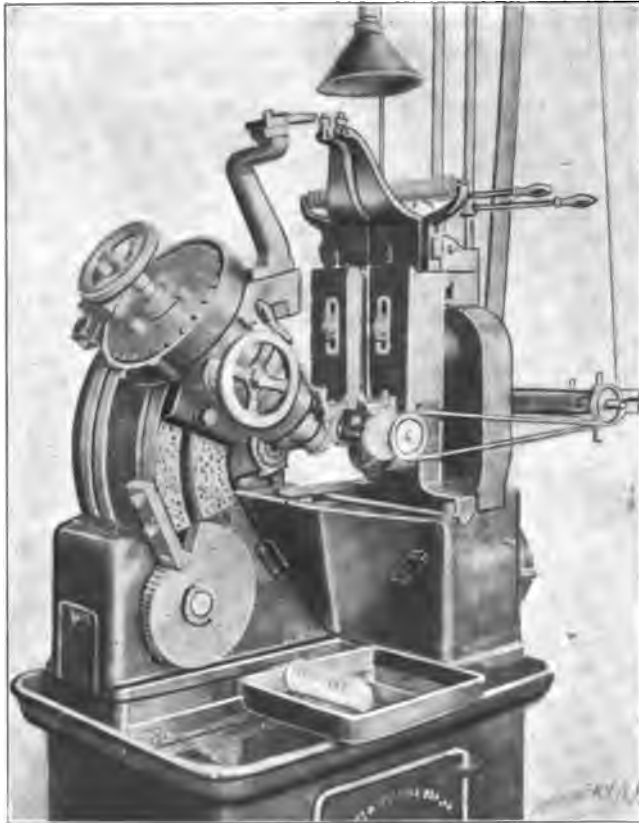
Bevel-gear Milling Machine of the Templet Type
